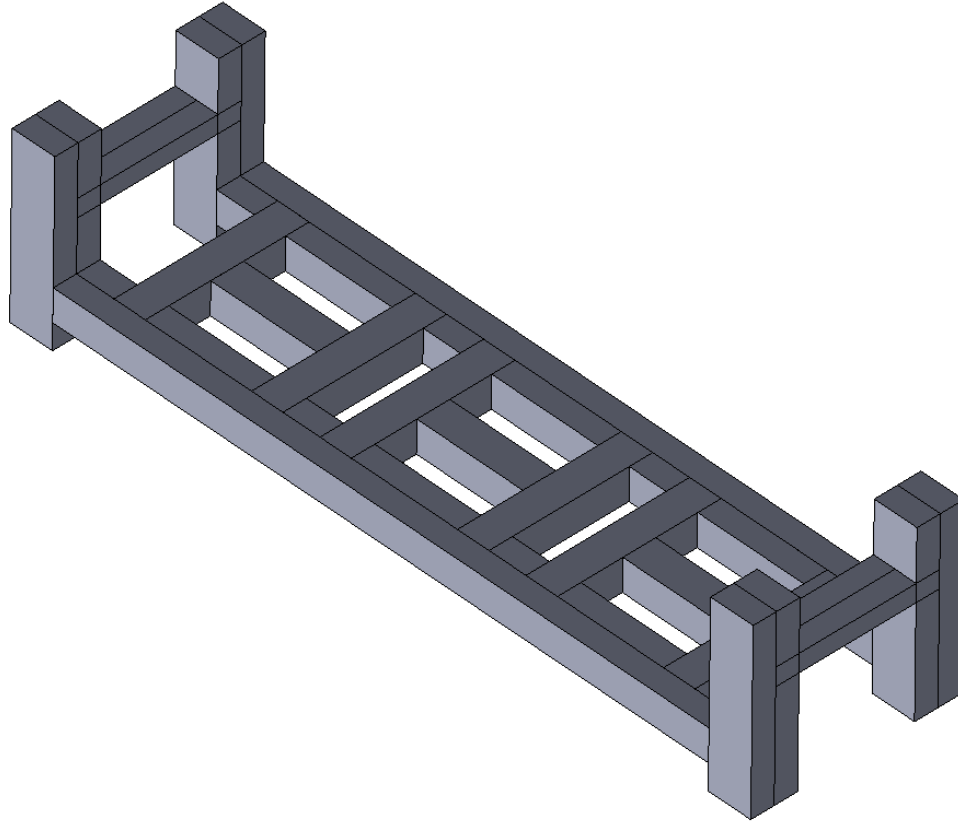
An isometric view of one rack bay showing the detail of the cross bracing.
